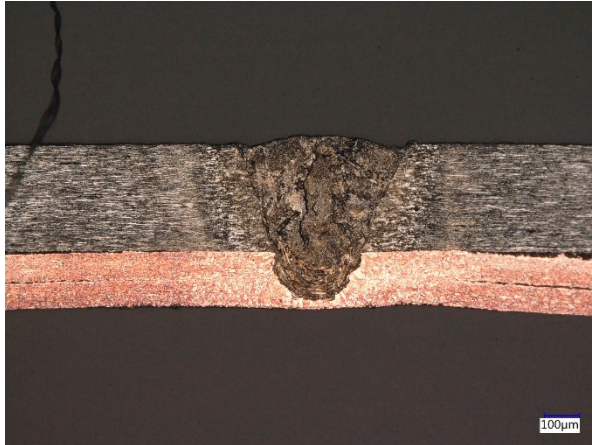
Example of the partial penetration welding of a cylindrical battery cell case to the inner copper electrode with the 500-Watt laser
